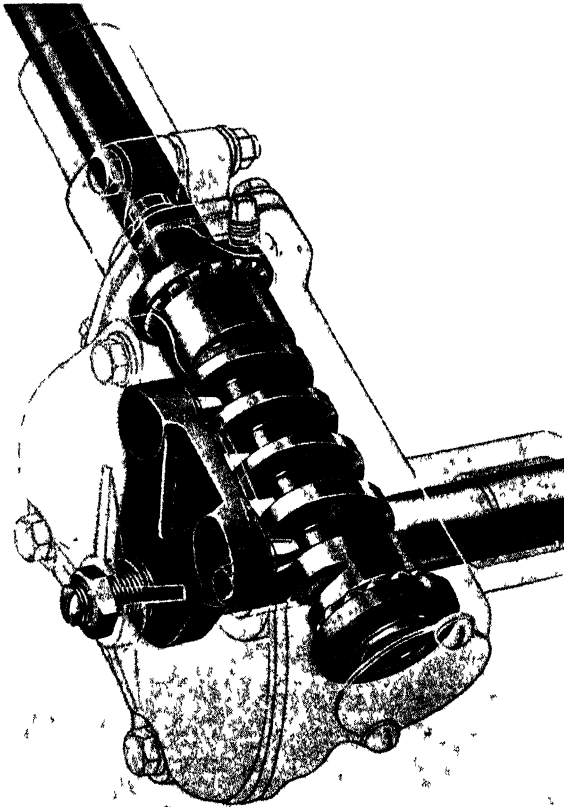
ROSS TWIN-LEVER STEERING GEAR
